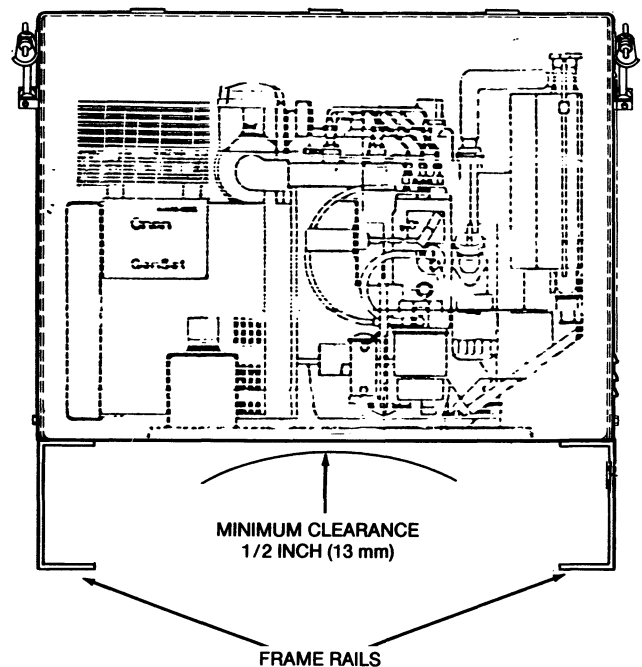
CRITICAL DIMENSION, HORIZONTAL VIEW
